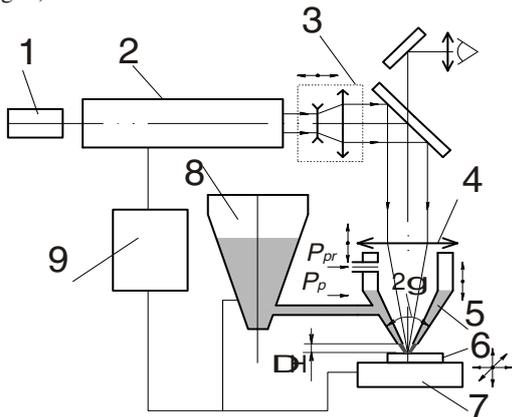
Industrial laser equipment: 1- assist laser; 2- working laser 200 W; 3- telescope; 4- focusing objective; 5 -coaxial nozzle; 6 – workpiece; 7 – worktable with 3 coordinates; 8- powder feeder; 9 – control unit.
